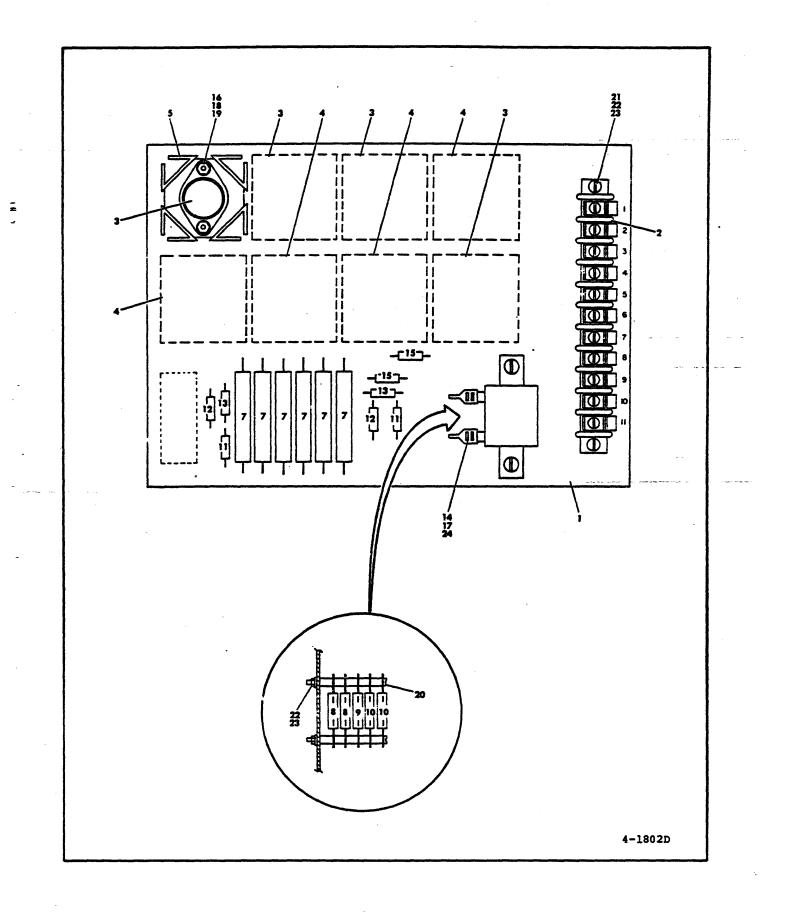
3ZCN COMPONENT ASSEMBLY
